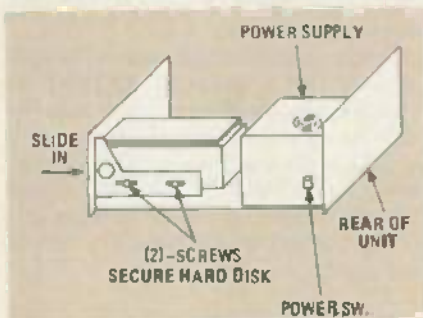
MOUNTING THE HARD DISK and power supply is straightforward.
